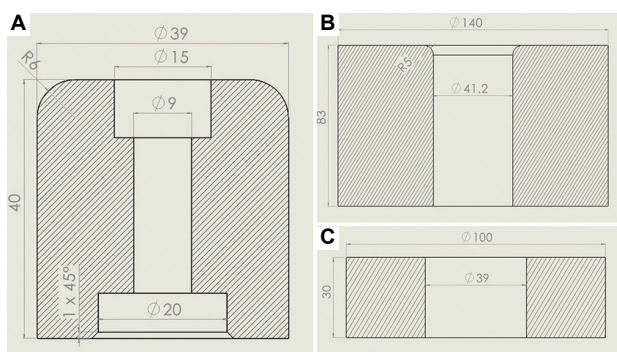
Geometry and dimensions of the deep drawing tooling system: (A) punch, (B) die, and (C) blank holder
